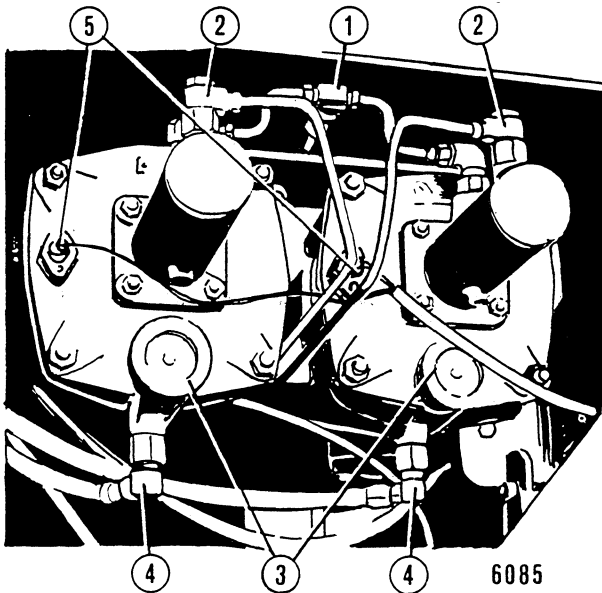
BRAKE BOOSTERS ON MACHINE
